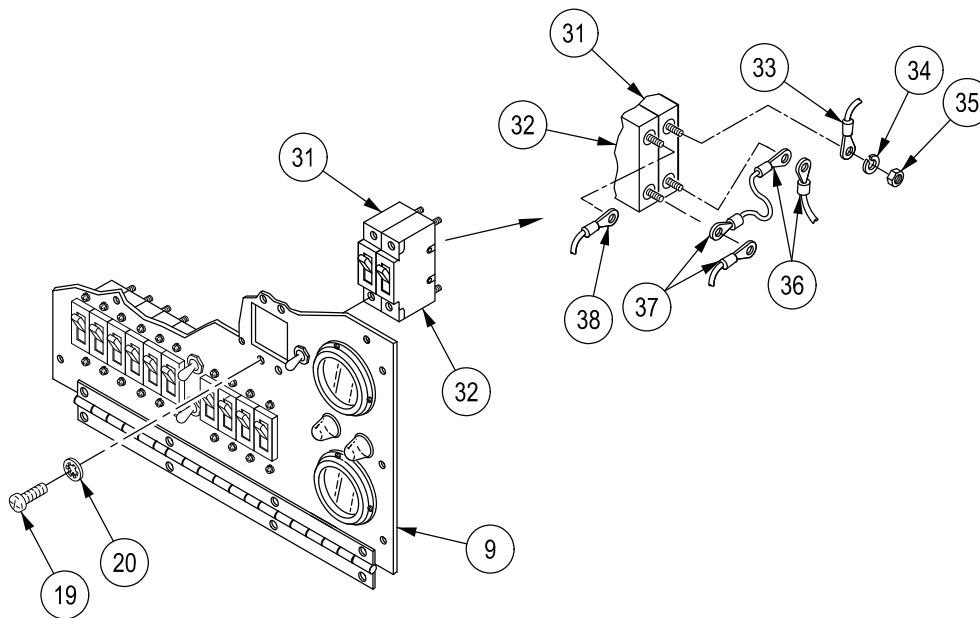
Faceplate Circuit Breaker CB3/CB4 Disassembly
